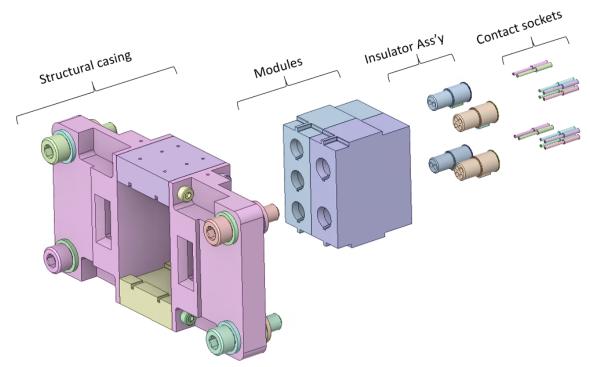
Sub-assemblies which FE female connector assembly is composed of
